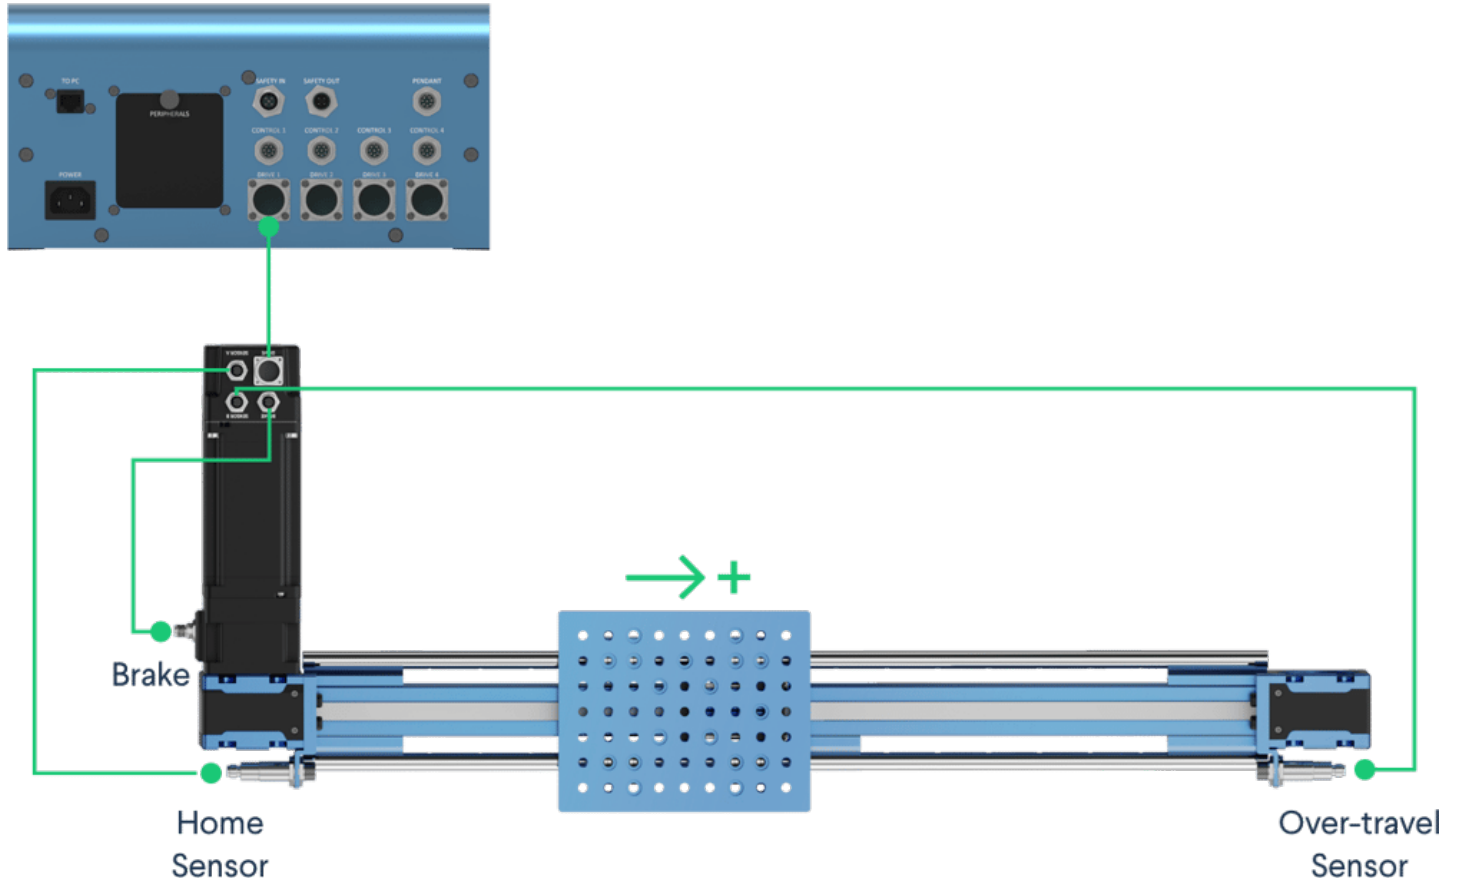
End-stop sensors connection. MachineMotion 2 controller shown - CE-CL-010-0004.
